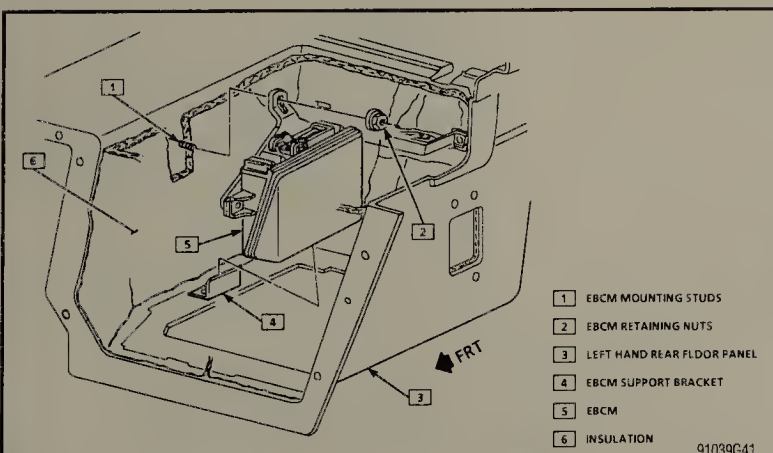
Exploded view of the EBCM on 1992-94 vehicles shown
